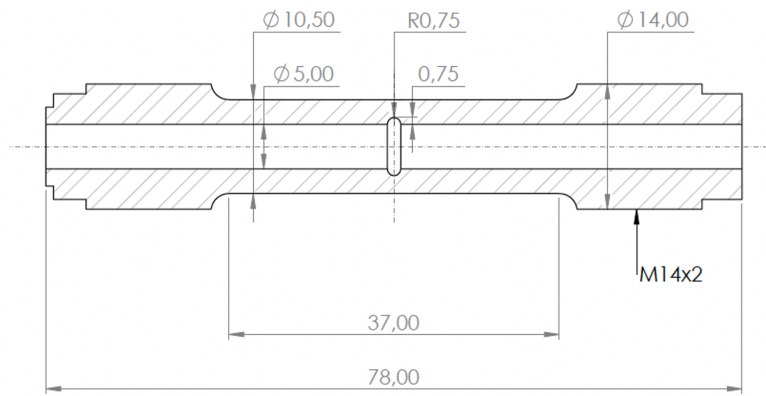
Engineering drawing showing the geometry of the specimen and notch. The dotted lines indicate the center of the specimen, and the hatched area represents the cross-sectional area. Dimensions are in mm. The engineering drawing with complete specifications is included in Appendix A.1.
